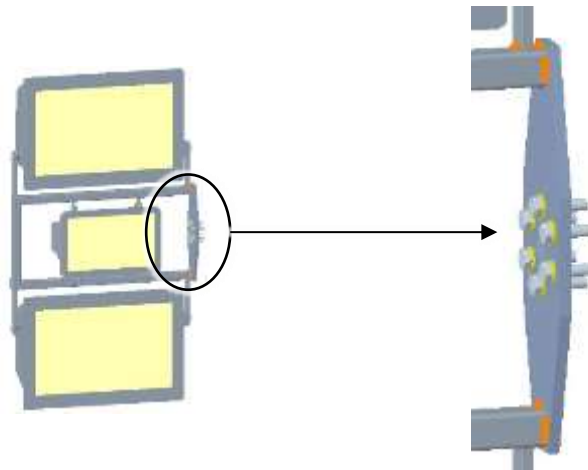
Fixing bracket with screws - TT HEAVY lamp units
